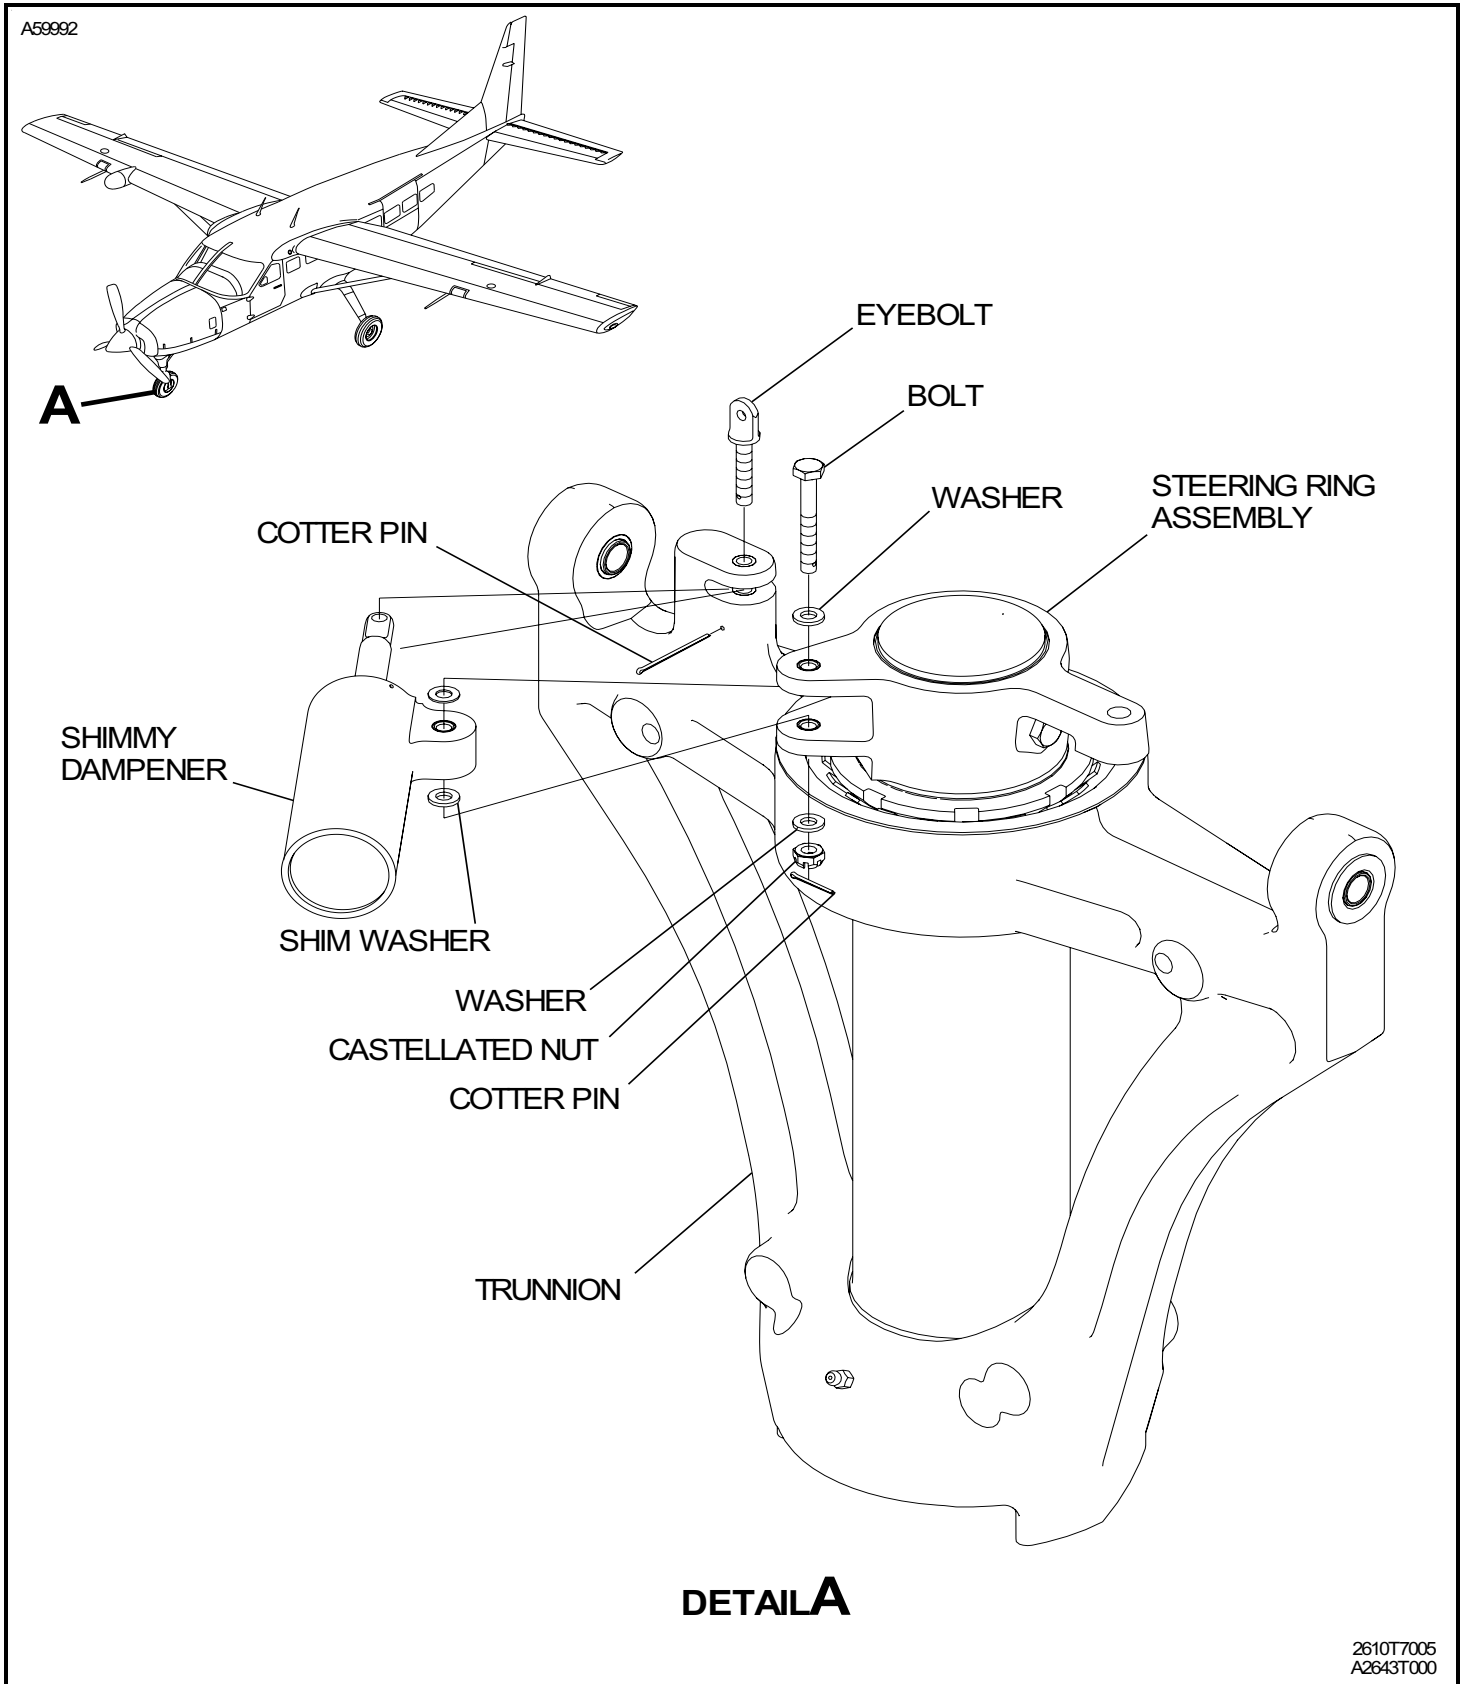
Sheet 1 : Shimmy Dampener Installation
